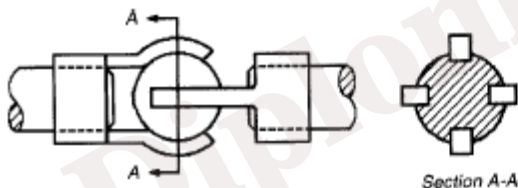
A grooved-sphere joint is a modification of a pinned sphere. Torques on fastening sleeves are bent over the sphere on the assembly. Greater sliding contact of the torques in grooves makes simple lubrication essential at high torques and alignment angles.
